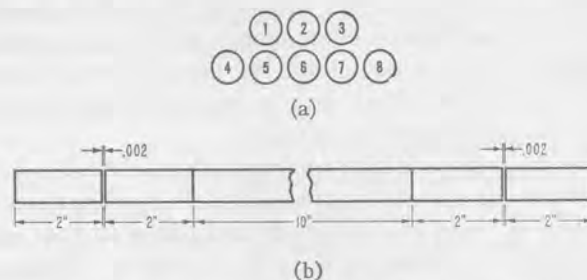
Arrangement of cylindrical cross capacitor. (a) Bar arrangement, (b) gauge bar assembly.
